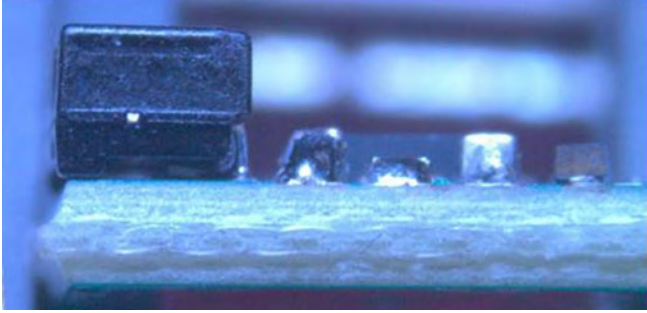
The component could have been damaged if a PCB depaneling machine were used.
